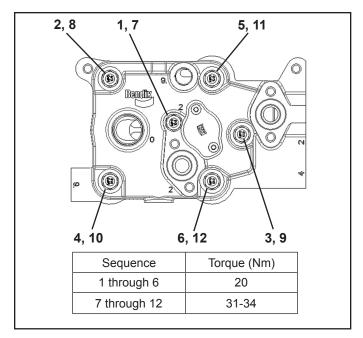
COMPRESSOR HEAD BOLT TORQUE SEQUENCE
